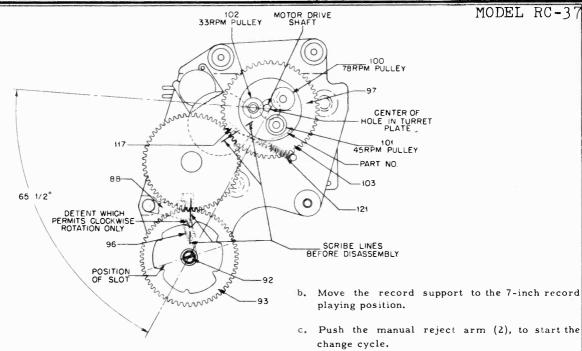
MOTOR GEAR TRAIN ASSEMBLY
